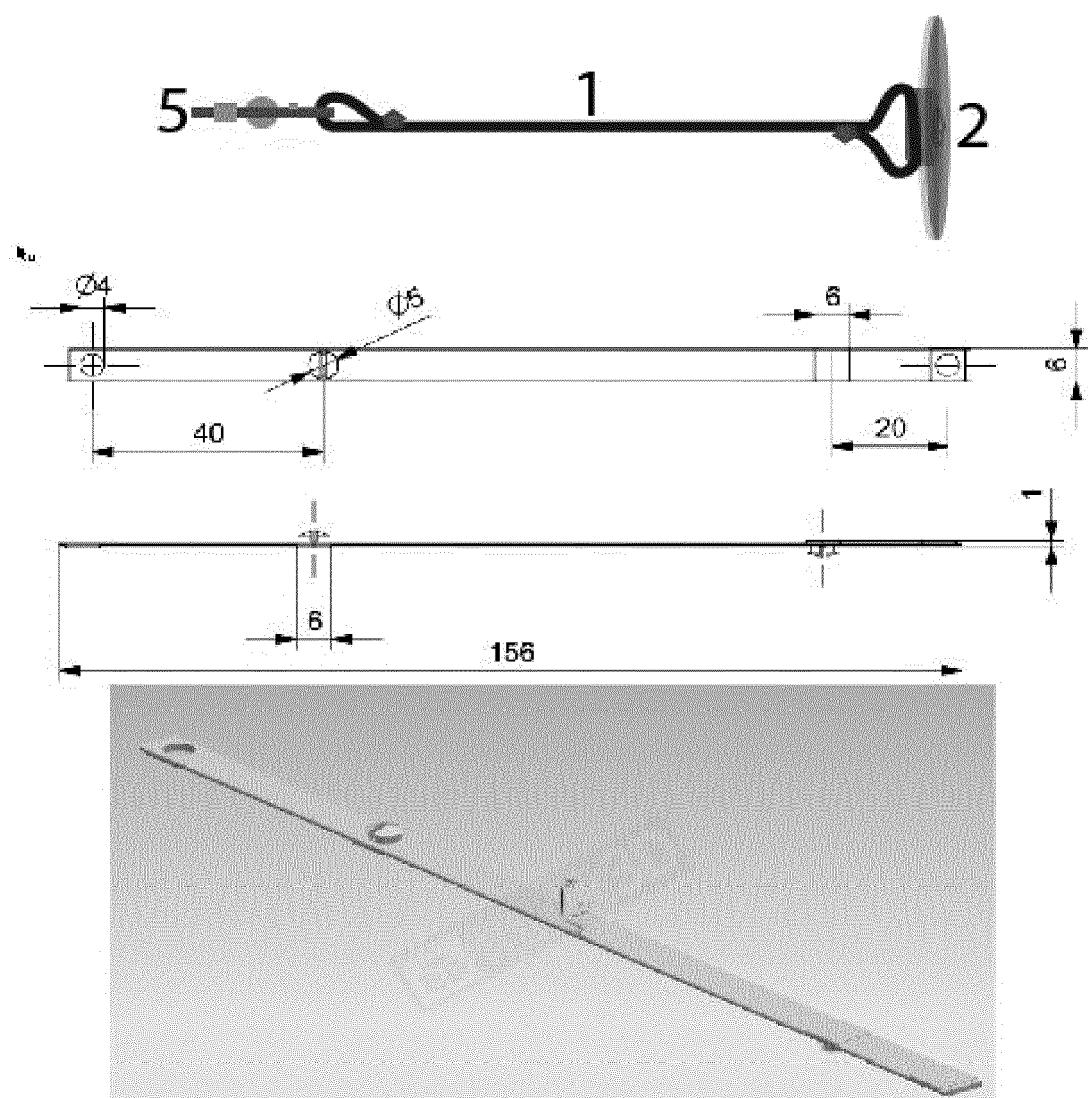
Schematic Perspective View of cables that are locked to the anchor plugs on one side and electronic component on the other side
